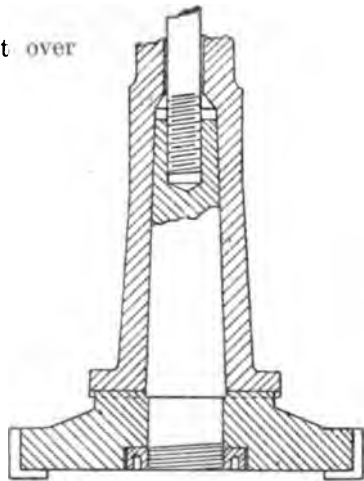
Large Face Cutter locked with Clutch and Ring Nut.
